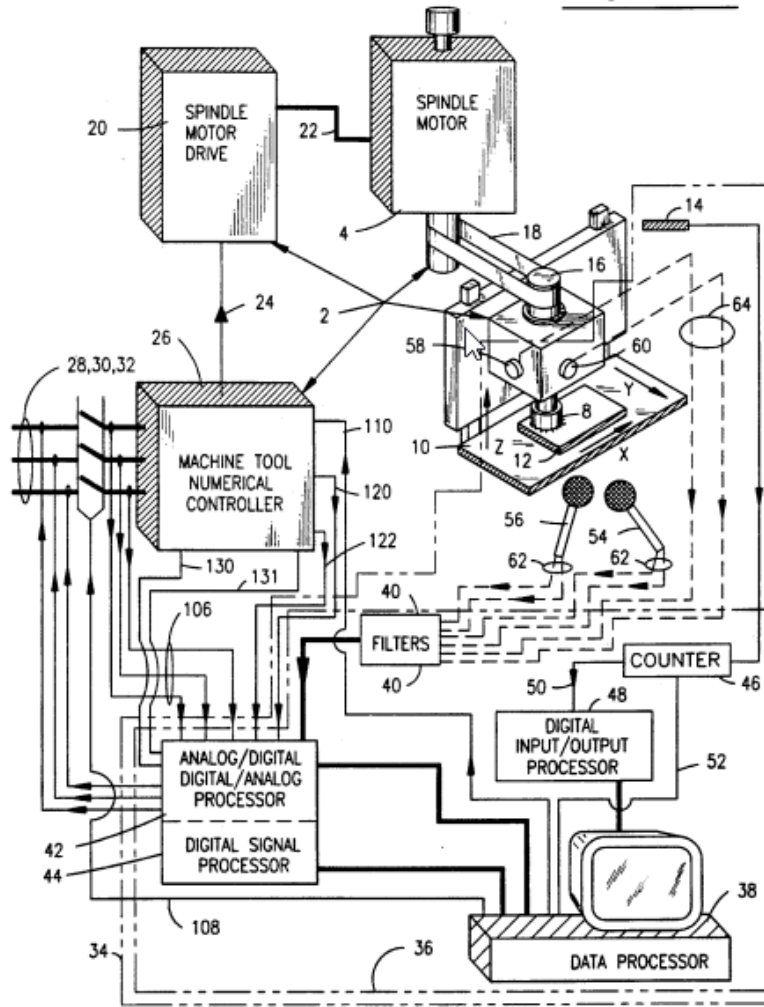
schematically shows “the overall control system hardware and its interface with a typical configuration of a machine tool.” *Id.* at 3:6–8. Machine tool 2 includes variable speed spindle motor 4, cutting tool 8, and table 10 for carrying workpiece 12. *Id.* at 3:27–33. Servo drives (not shown) move the milling head in the Z-direction and table 10 in the X- and Y-directions. *Id.* at 3:29–30, 3:33–35. Machine tool numerical controller 26 sends motor drive command signals 24 to spindle motor drive 20, which controls spindle motor 4. *Id.* at 3:41–47. Controller 26 also generates servo signals 28, 30, 32 that cause the servos to manipulate the relative position of cutting tool 8 and workpiece 12. *Id.* at 3:50–58.
